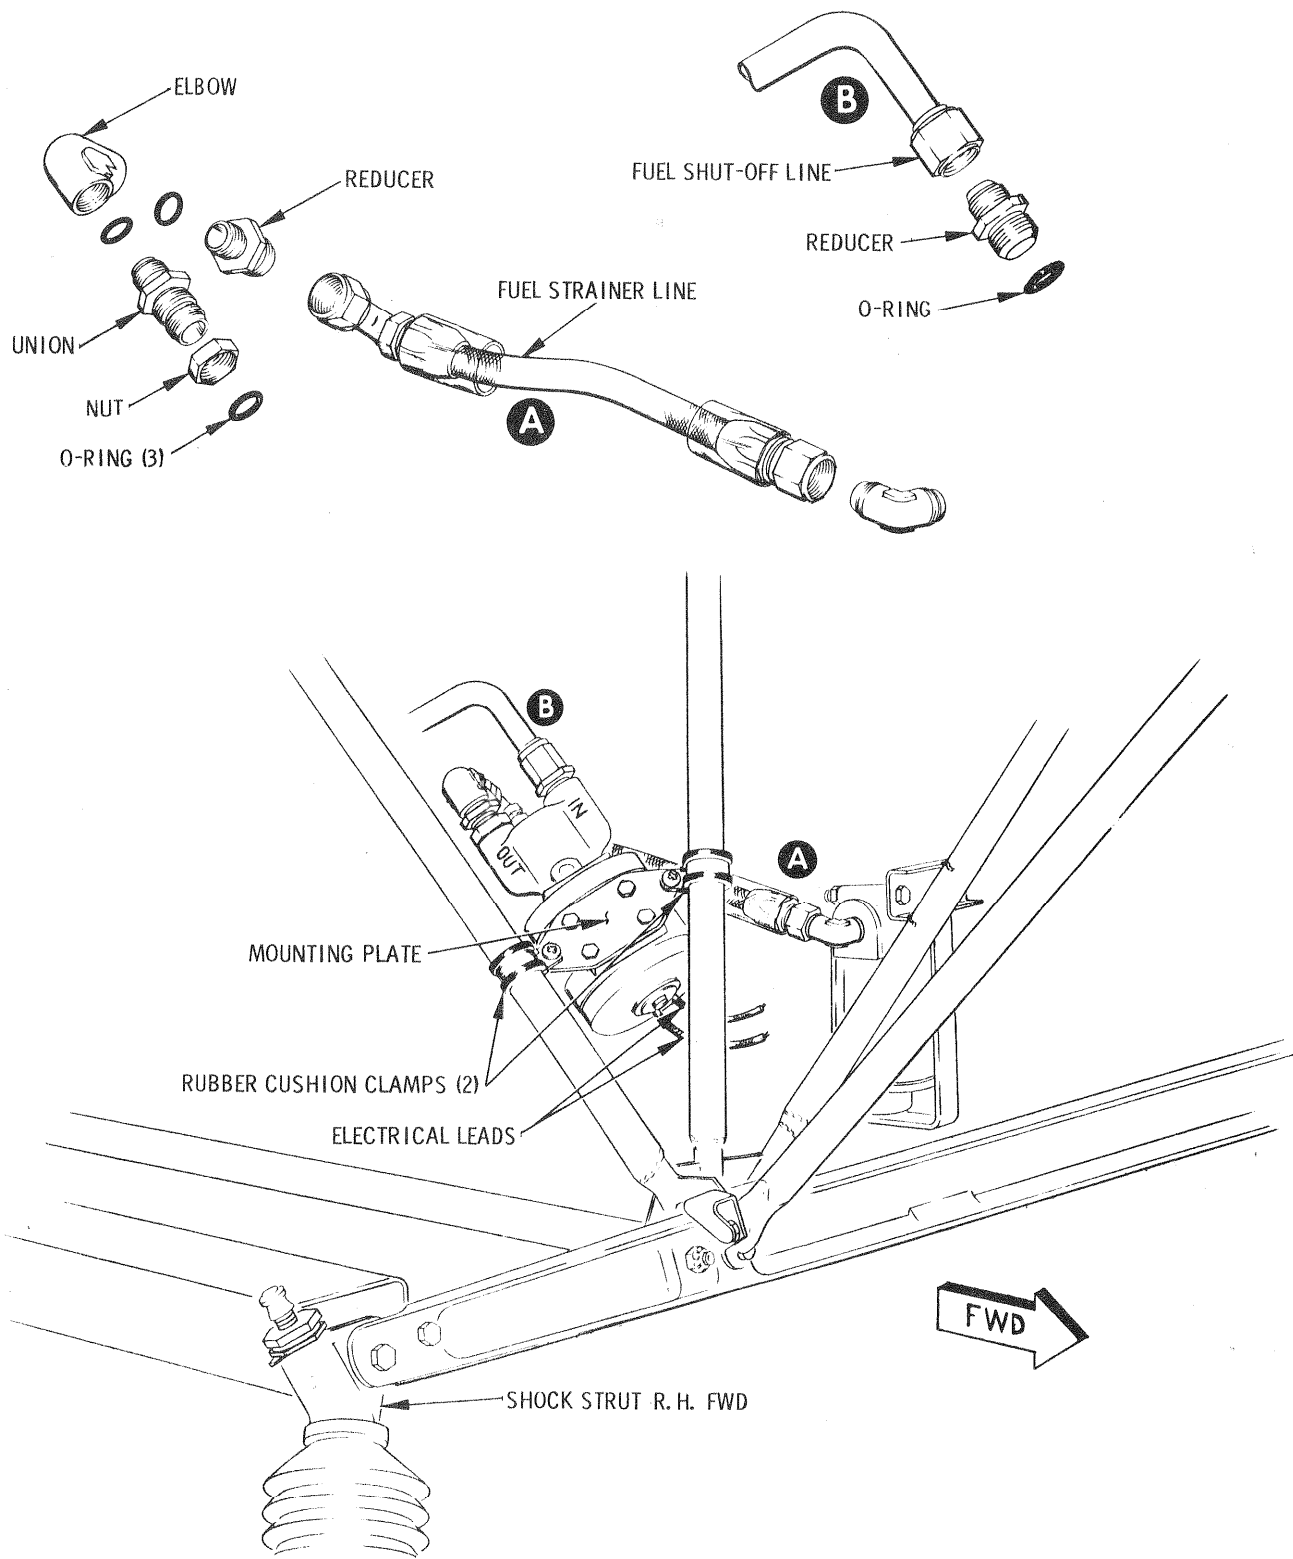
269B(-5) AUXILIARY FUEL PUMP INSTALLATION
